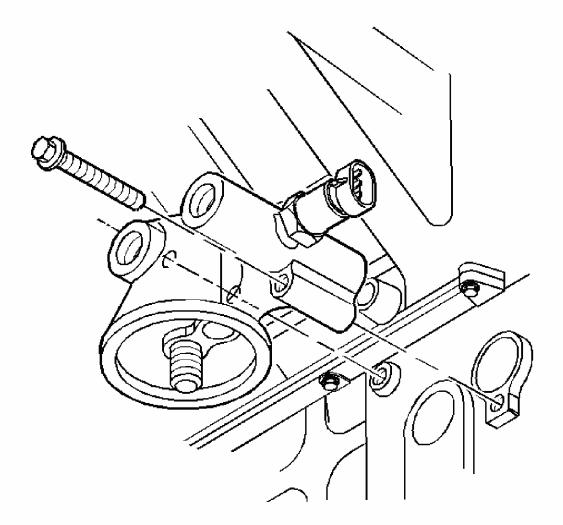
Identifying Adapter Mounting Bolts Courtesy of GENERAL MOTORS CORP.
